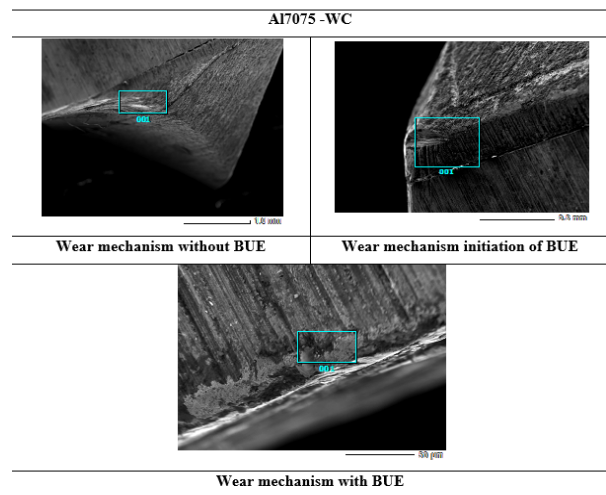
Tool wear mechanisms while Al7075 drilled with carbide insert drill
